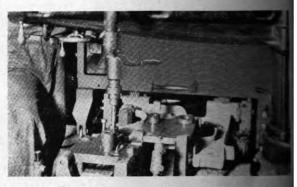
Locating and clamping the pressing machine head for milling as shown in Fig. 7.
